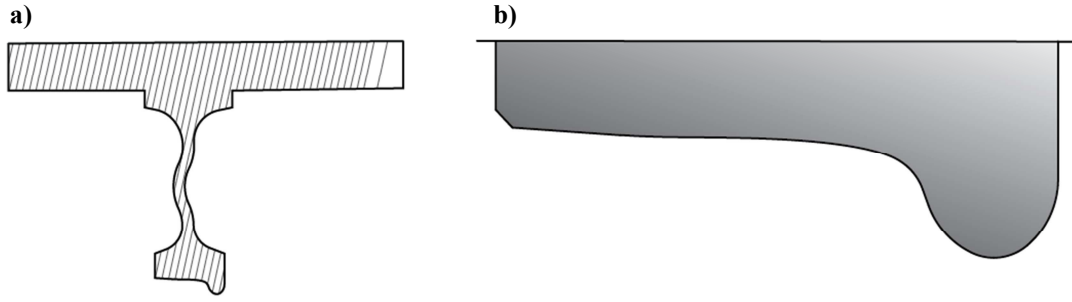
a) wheel cross section. b) Wheel tread zoom.
